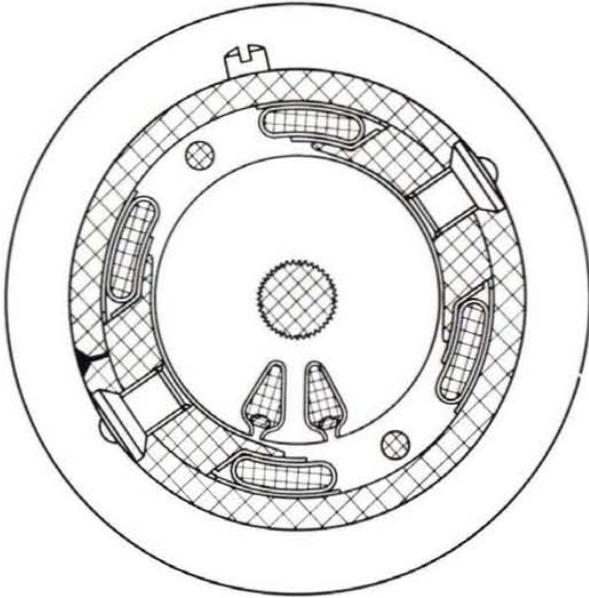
End sectional view of generator across field frame, pole shoes and windings.
